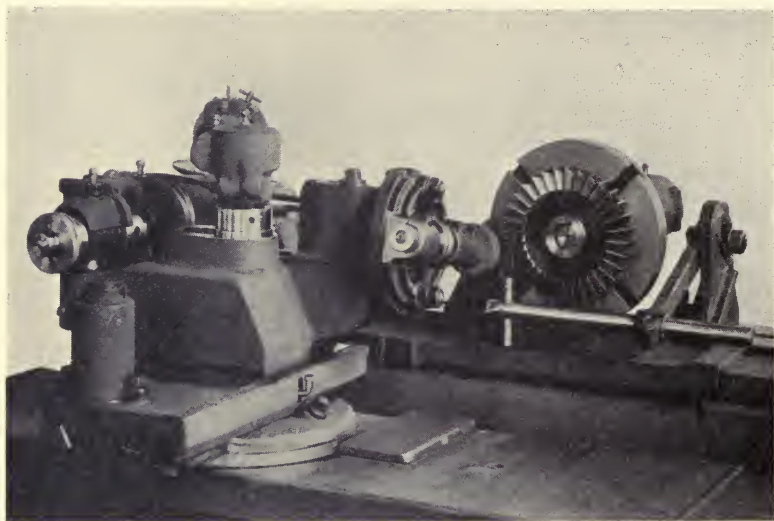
CLEARANCE WITH AUXILIARY WHEEL HEAD—LANDIS UNIVERSAL GRINDER
